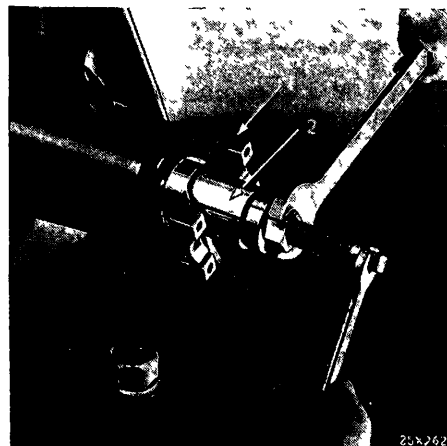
Installing drive pinion flange (1) with special driver (2), 1935-52
